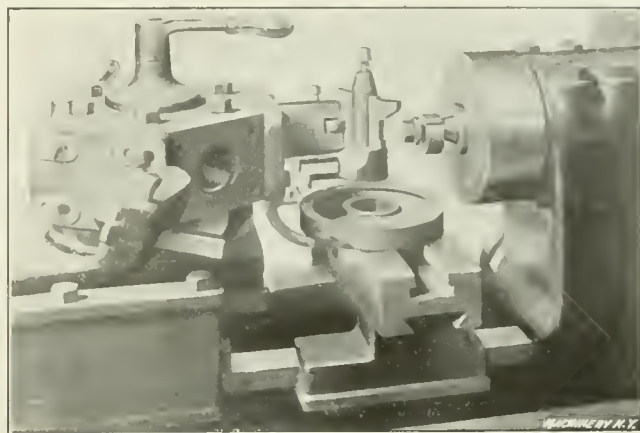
View showing the Stub Mandrel used in holding the Gear Blanks for the Second Operation
